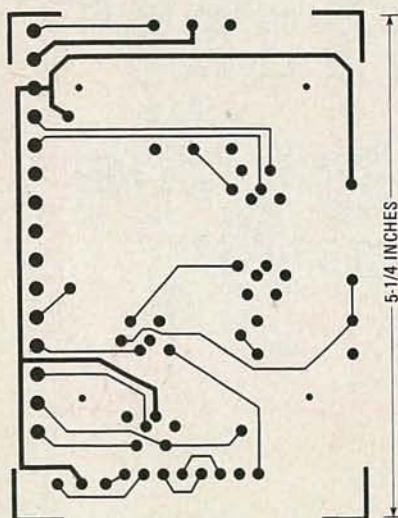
FOIL PATTERN for bottom of telephone adaptor board.
